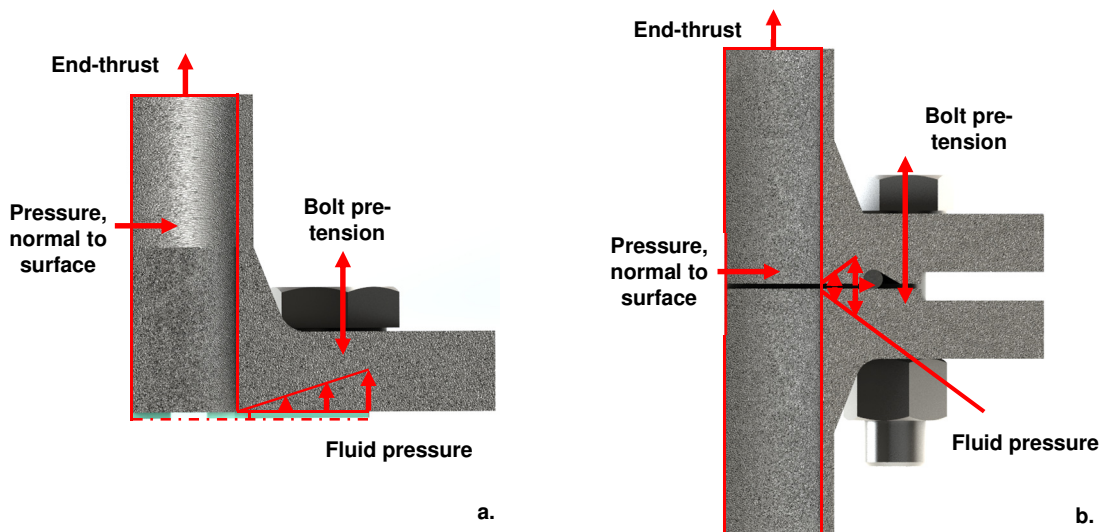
Application of the loads to the non-linear finite element models of (a) the flat and raised face flanges, and (b) the raised face flange with an O-ring groove
